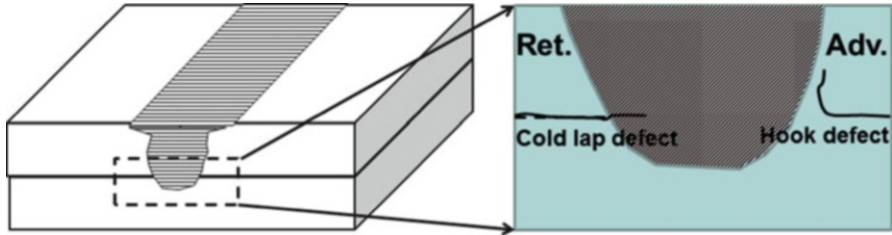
Examples of faying surface related basic defect formation in friction stir lap welds, (a) cold lap defect, and (b) hook formation
